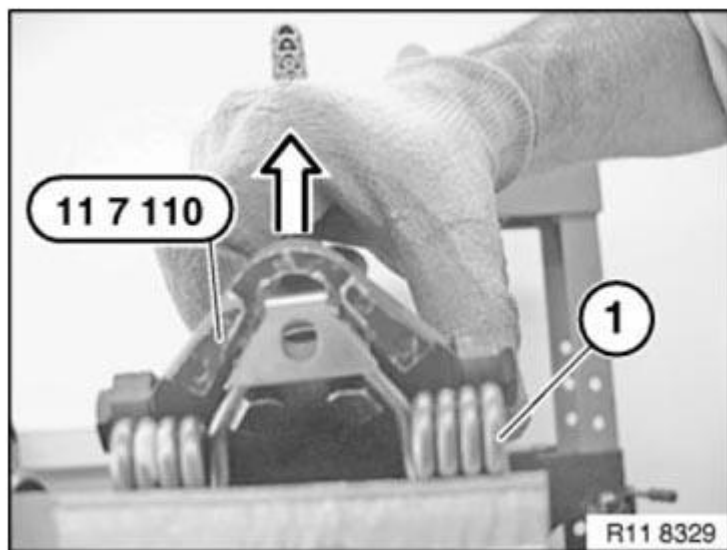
Positioning Special Tool (11 7 110) On Return Spring
